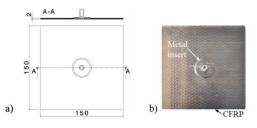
a) Dimensions of the specimens b) exemplary picture of a specimen
